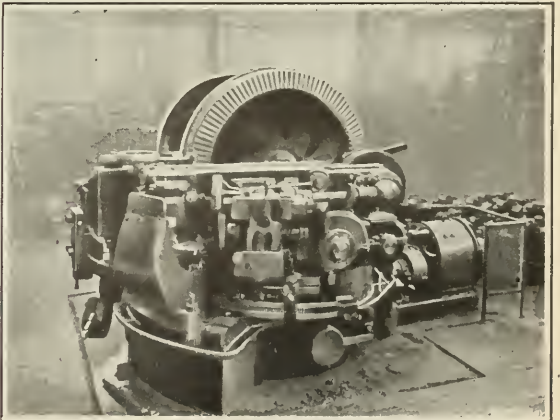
Gleason Templet Gear Planer planing Bevel Main Drive Gears
